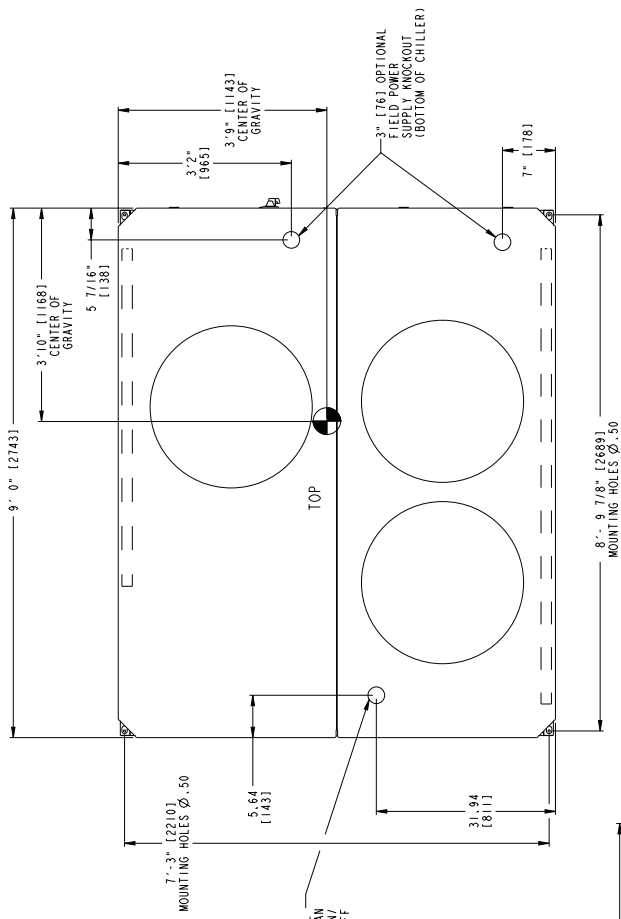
Dimensions — 30RA022,025 AquaSnap™ Chiller
